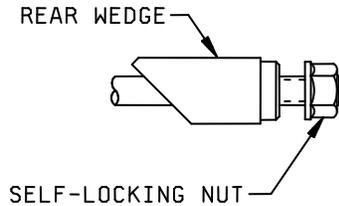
Screw retaining self-locking nut (corrosion resistant) details.
